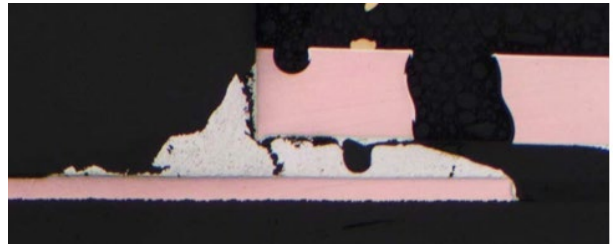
MLF-20 SAC305 Solder, Failed at 332 Cycles
